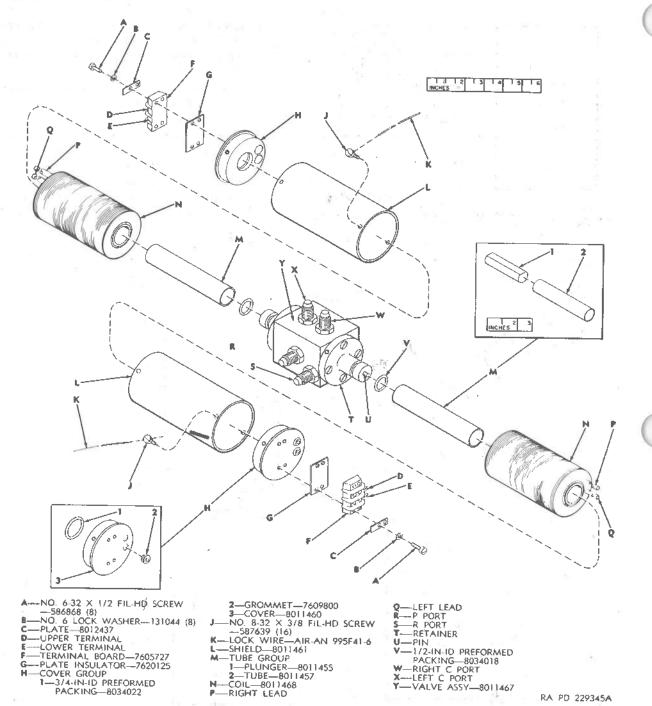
Solenoid valve assembly 8011469—partially exploded view.
